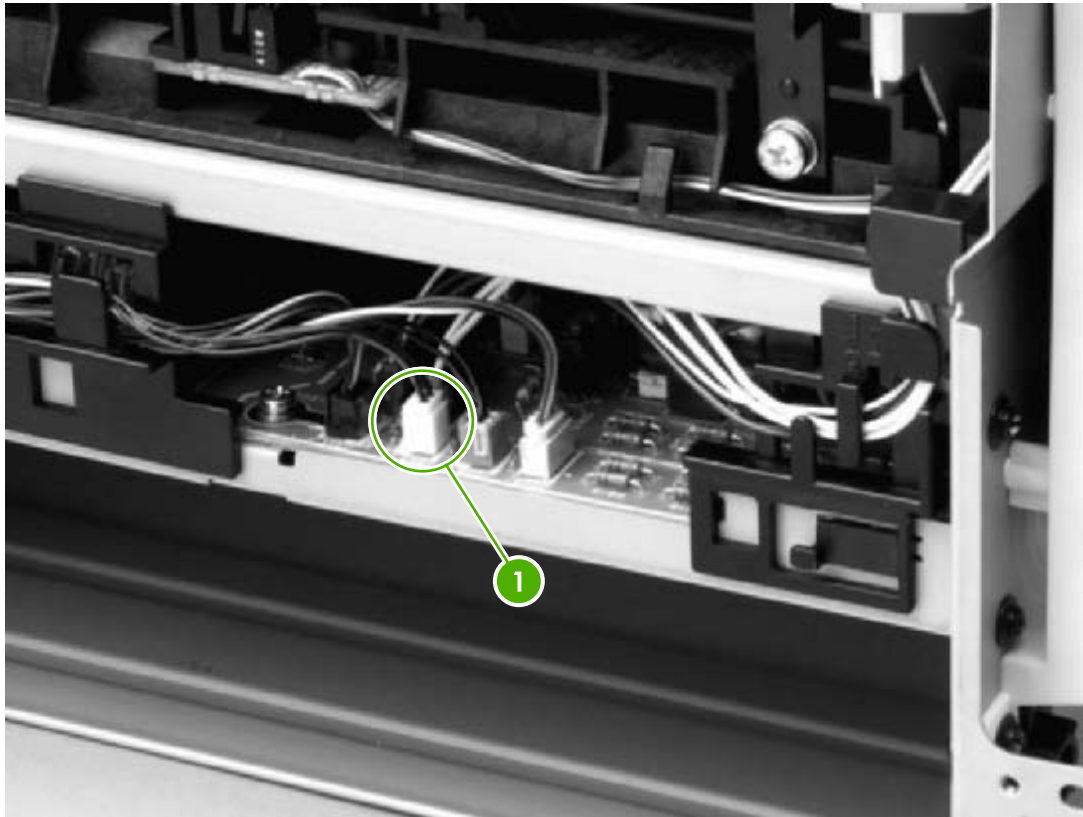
Removing the tray 2 pickup solenoid (1 of 2)
